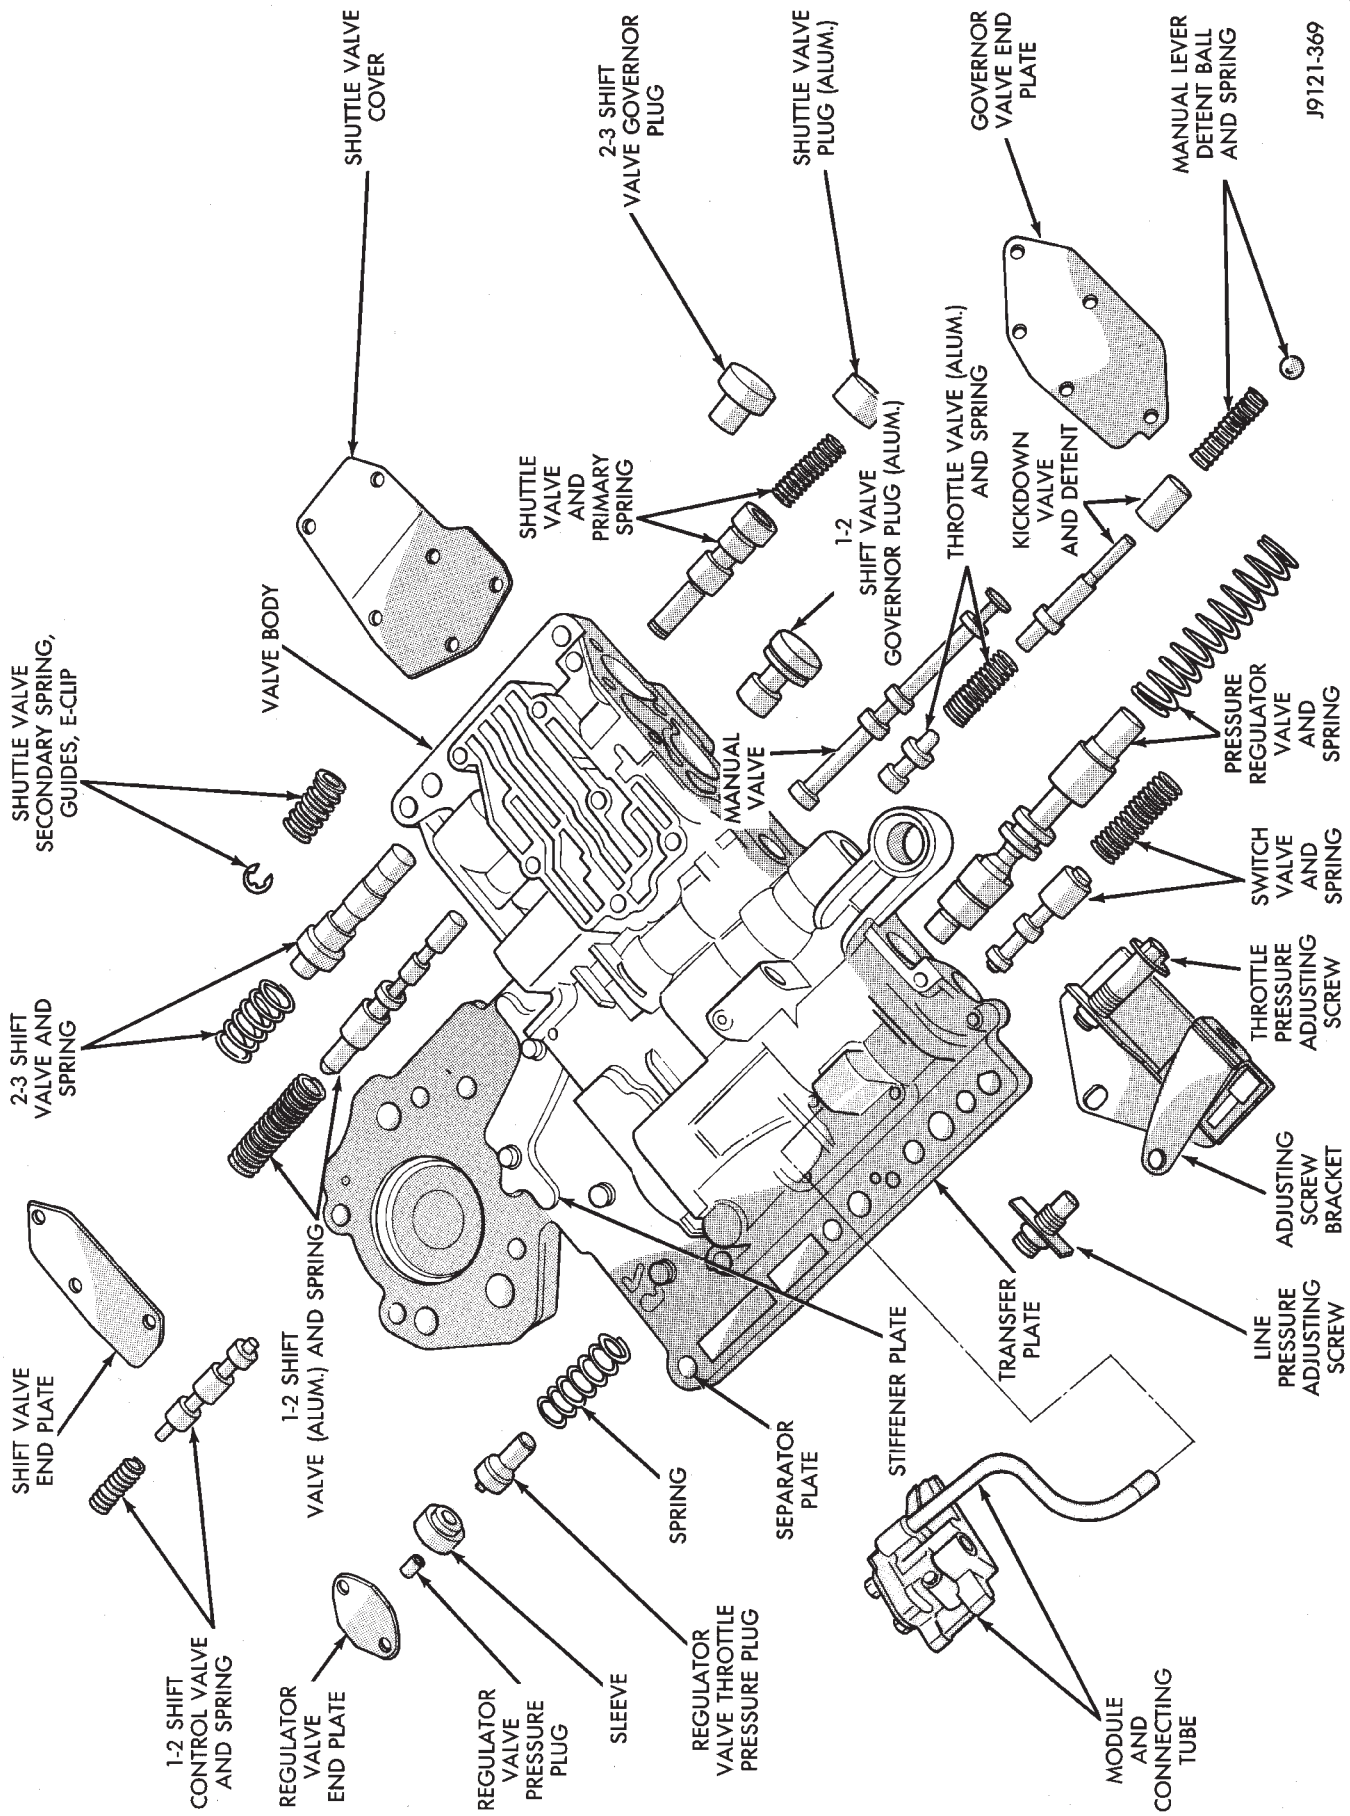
Valve Body Components (Alum.) Indicates Aluminum Part
